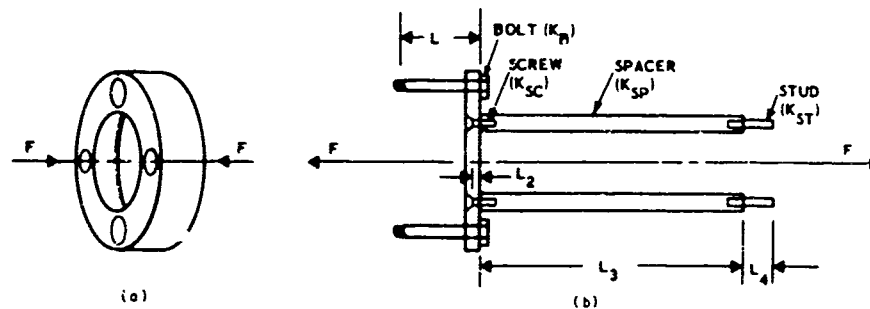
(a) Corprene disc, and (b) first mechanical spacer assembly
